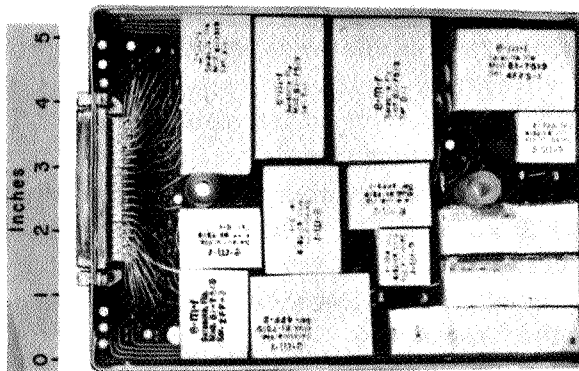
Printed circuit card, mounting encapsulated welded "cordwood" modules.
